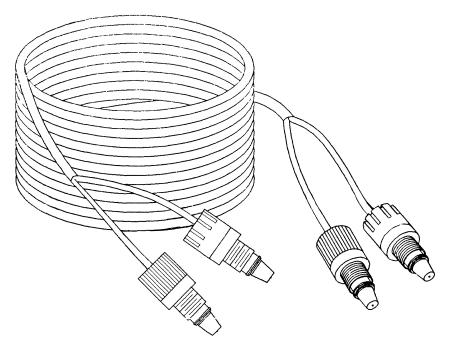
Typical Fiber-Optic Jumper Cable Assembly
